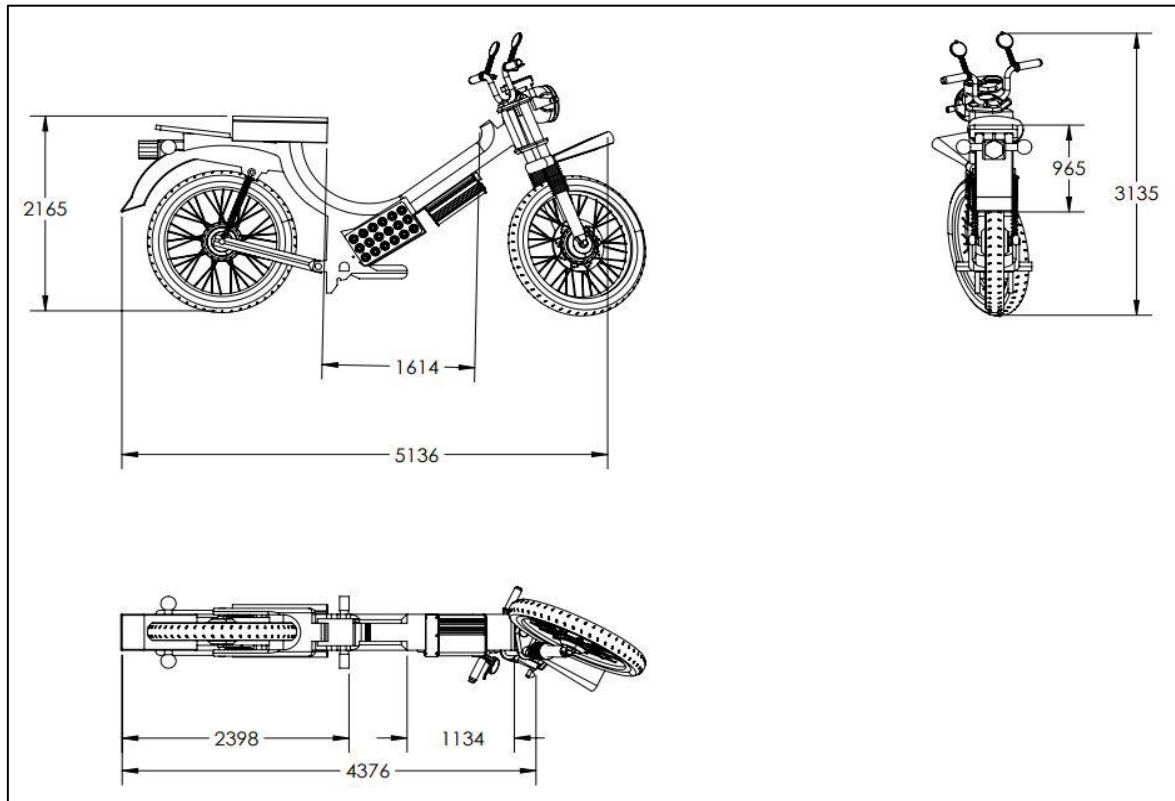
Body Design of the Electric Motorcycle Showing Dimensions
